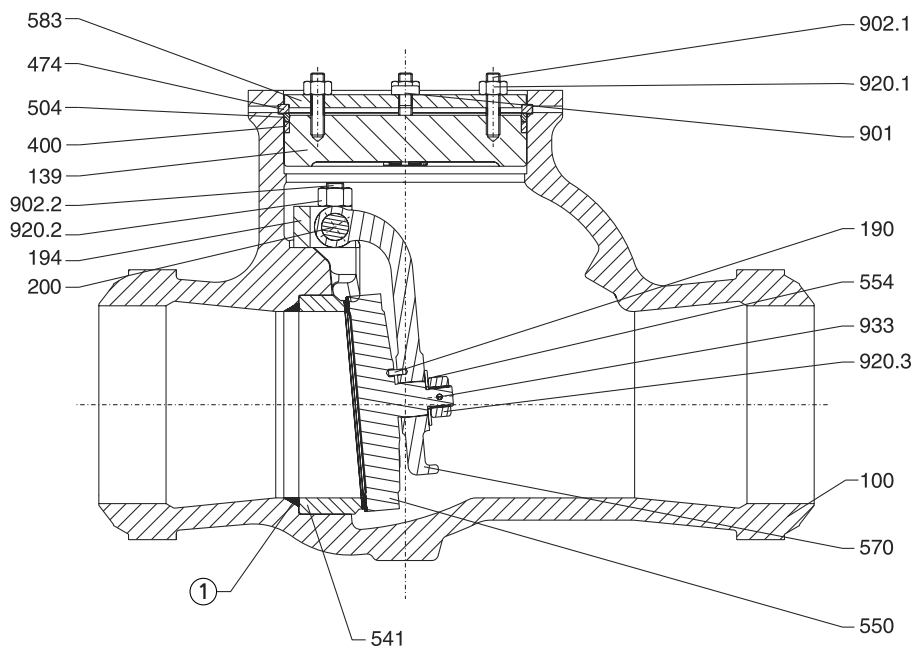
Sectional drawing of SICCA 900-3600 SCC
